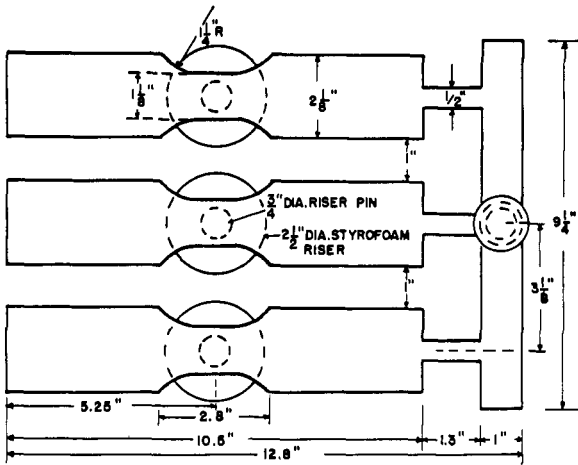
Gating and Riser Arrangement for Bending Fatigue Specimens.
